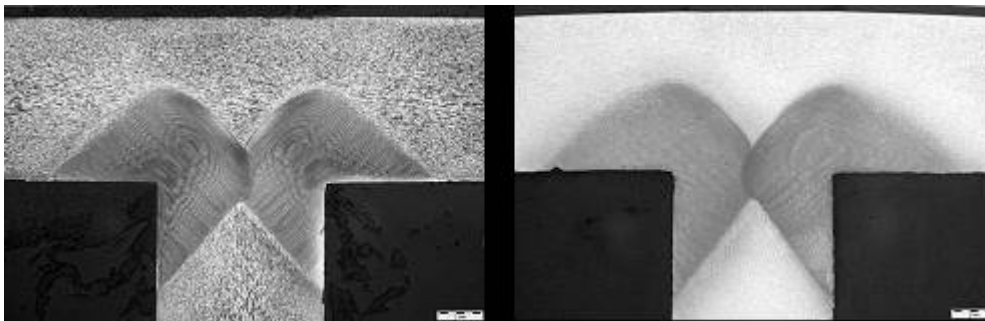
Cross Sections of welds obtained in 2024 T4 with original (left) and revised tool design (right).
